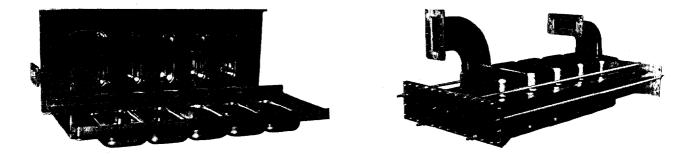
5-cell cavity with HOM couplers. A: Halves after electropolishing, B: assembly prior to welding.
